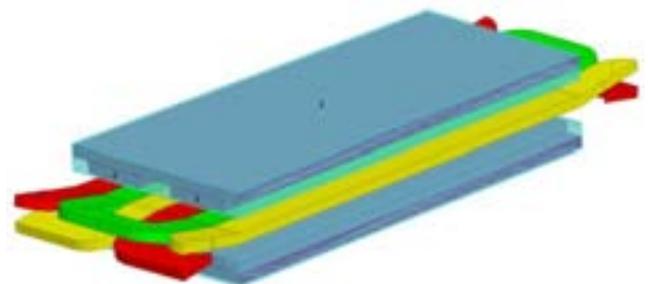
3D model of the ironless machine. 1 – rotor, 2 – PMs.
